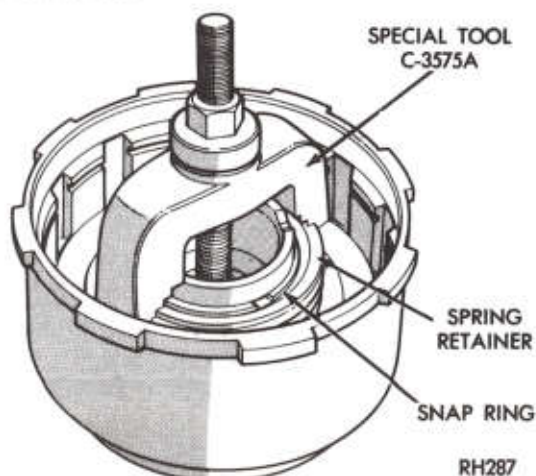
Front Clutch Spring Retaining Snap Ring (A-904T and A-999)
